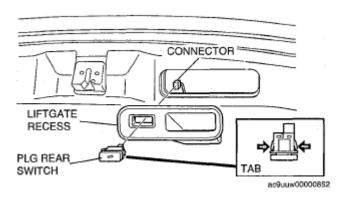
Identifying PLG Rear Switch & Connector Courtesy of MAZDA MOTORS CORP.
